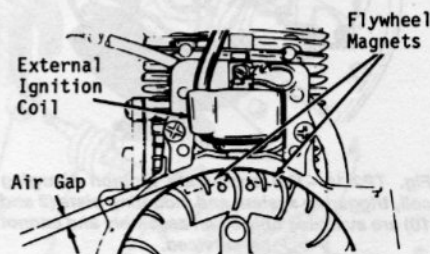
On engines with ignition coil mounted outside of flywheel, air gap between coil laminations and flywheel magnets should be set to 0.005-0.008 inch (0.13-0.20 mm).
